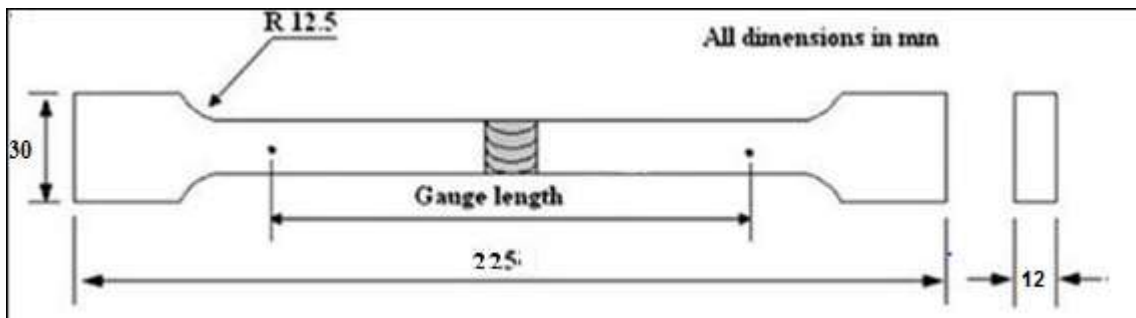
Illustration of weld samples for the tests.
